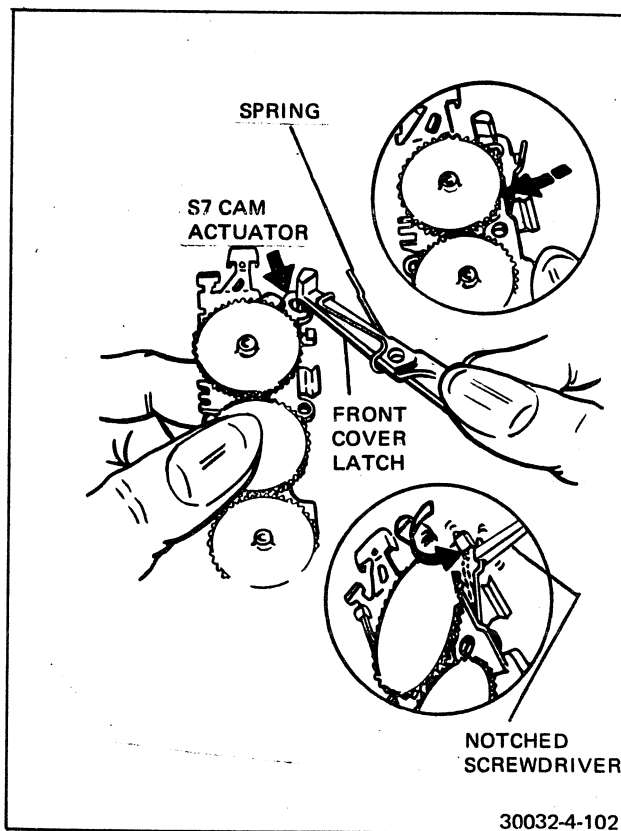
INSTALLING FRONT COVER LATCH & SPRING
